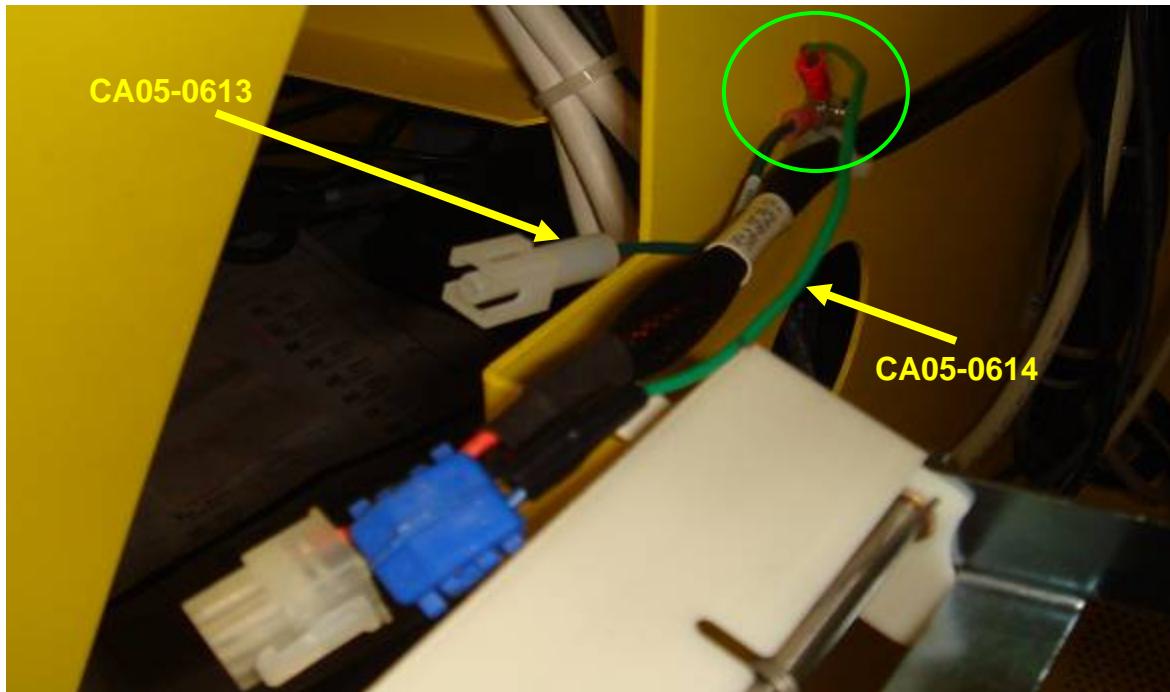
Connecting Printer Grounds to the Terminal's Cabinet Wall
